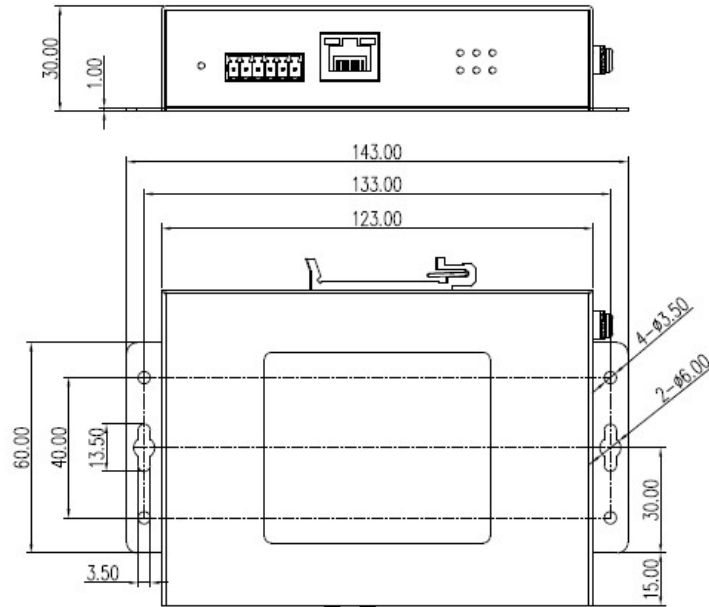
KGW3204A-2T4D-232/485-4G-L17 Dimension Drawing
